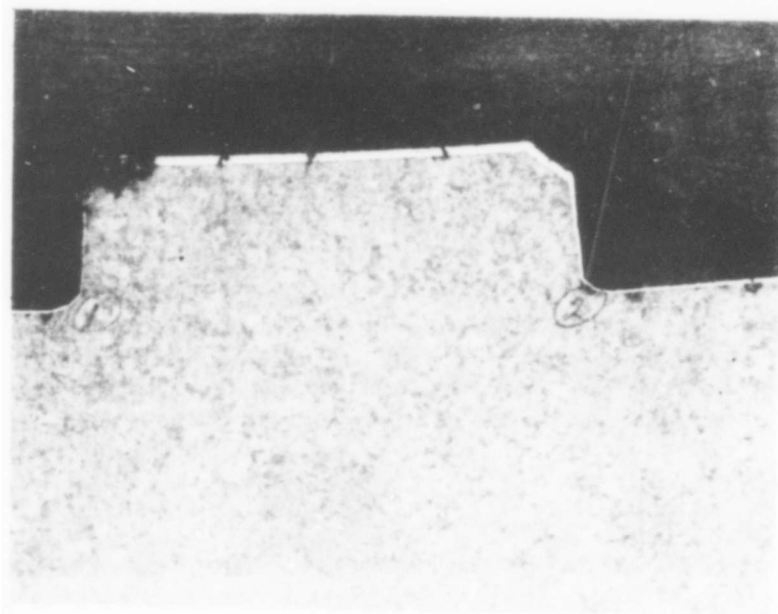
Tube S.N.53; Section 1; 3 o'clock.
